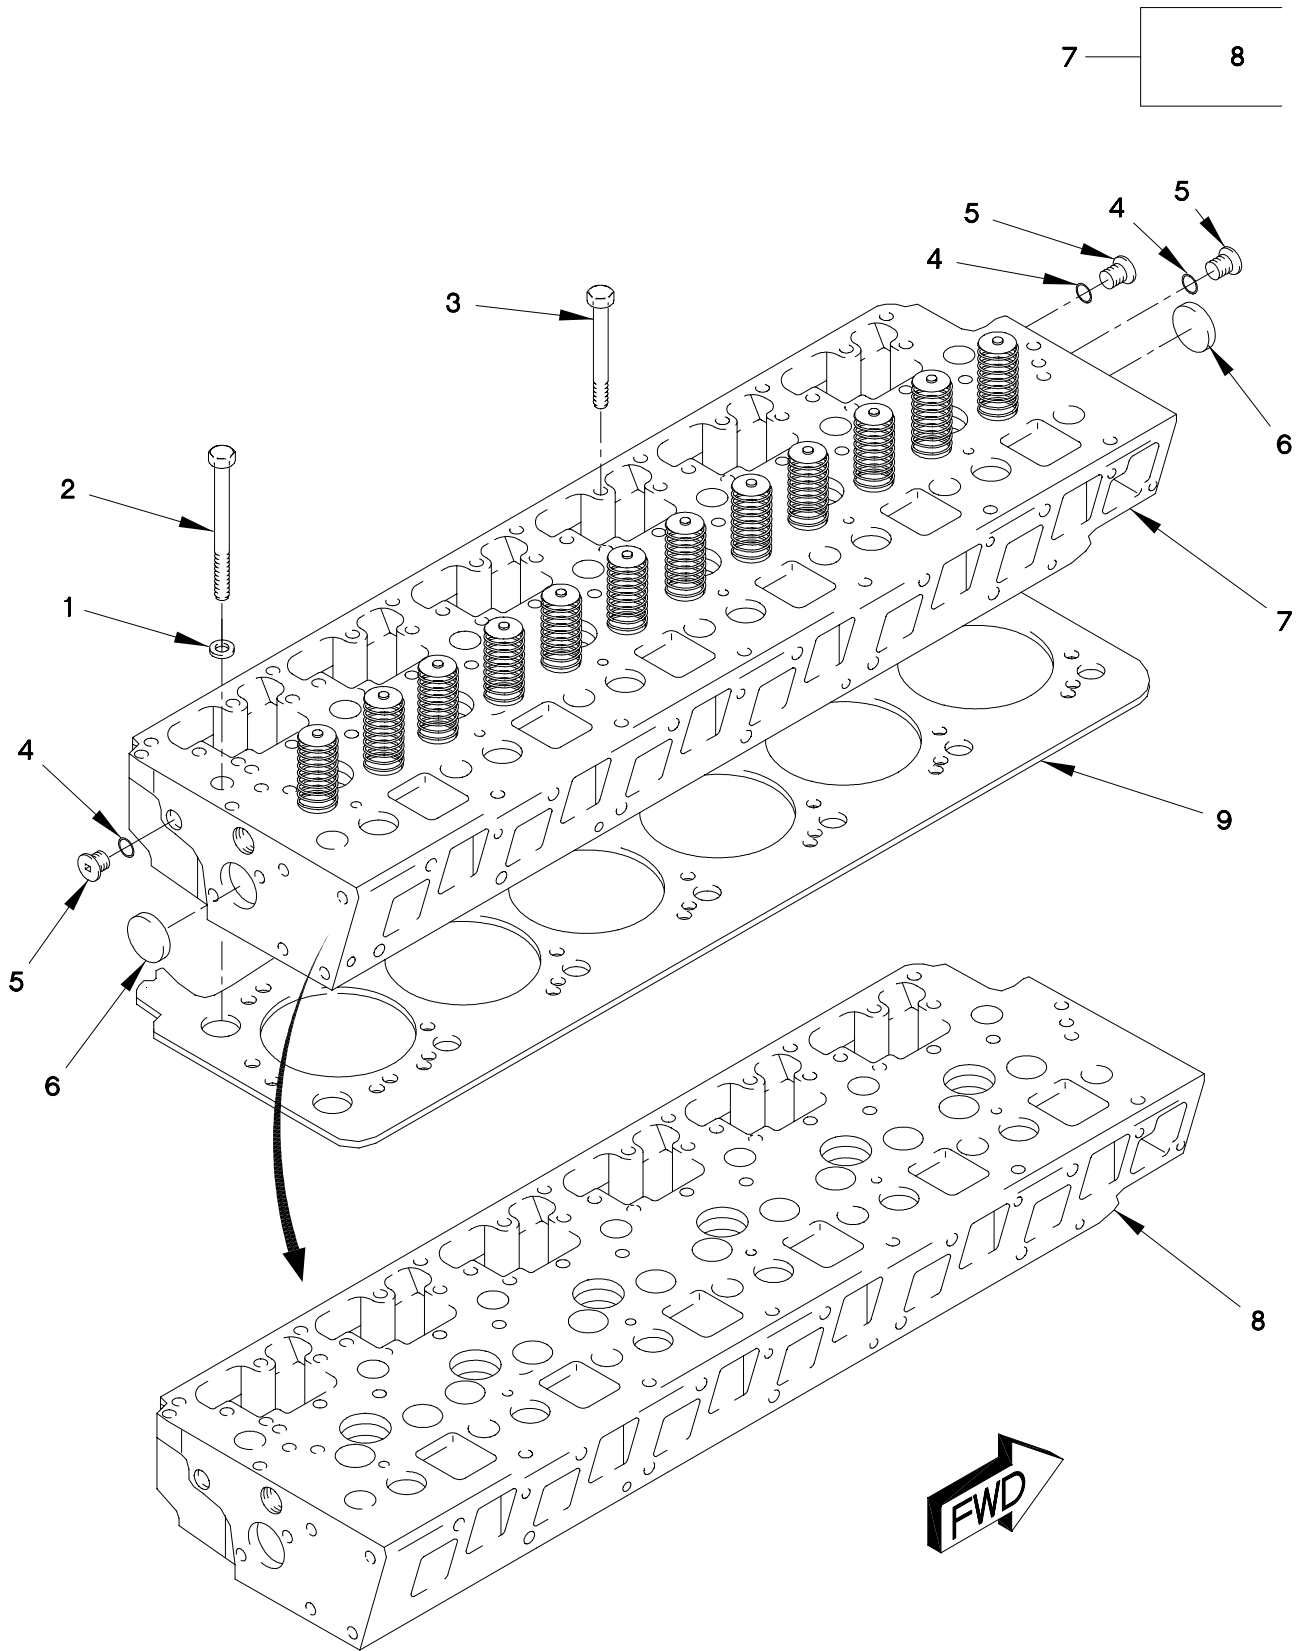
CYLINDER HEAD WITH VALVES AND GASKET
